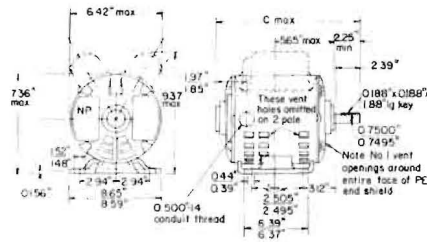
G-E 40-size; NEMA 66-frame motors (welded base)
